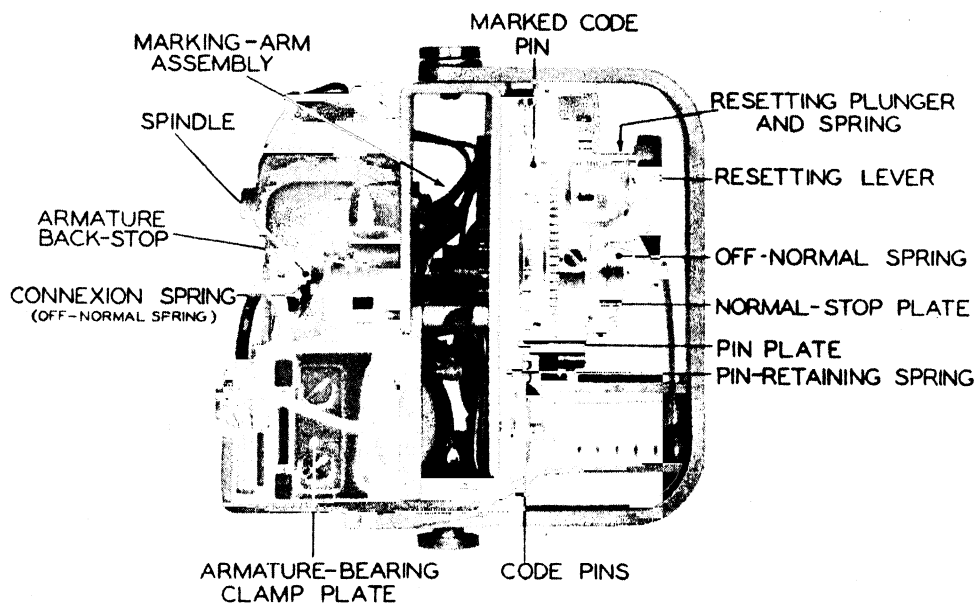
END VIEW OF REGENERATOR SHOWING MARKING PINS, ETC.
